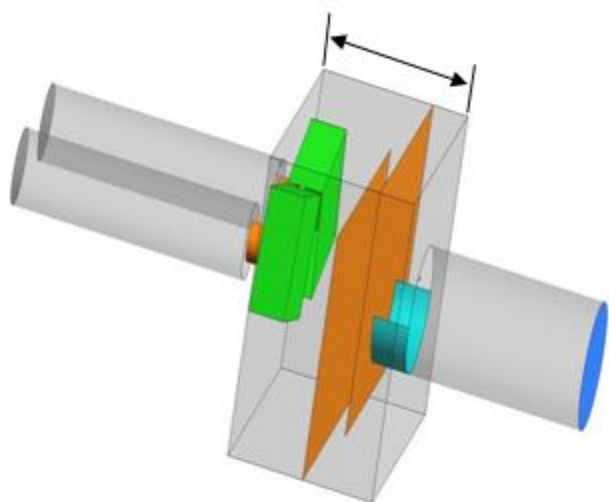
Three dimensional geometrical model of rectangular-shaped PG Carburettor
